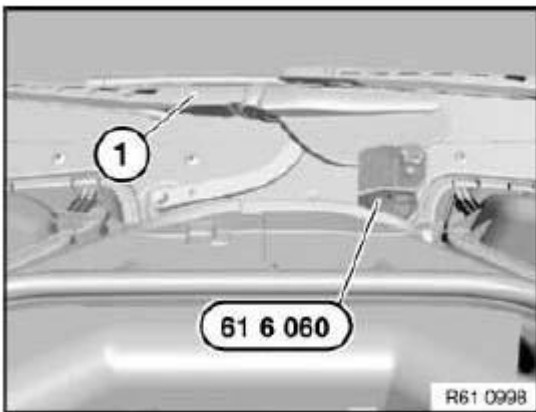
Identifying Special Tool (61 6 060) On Wiper Arm
